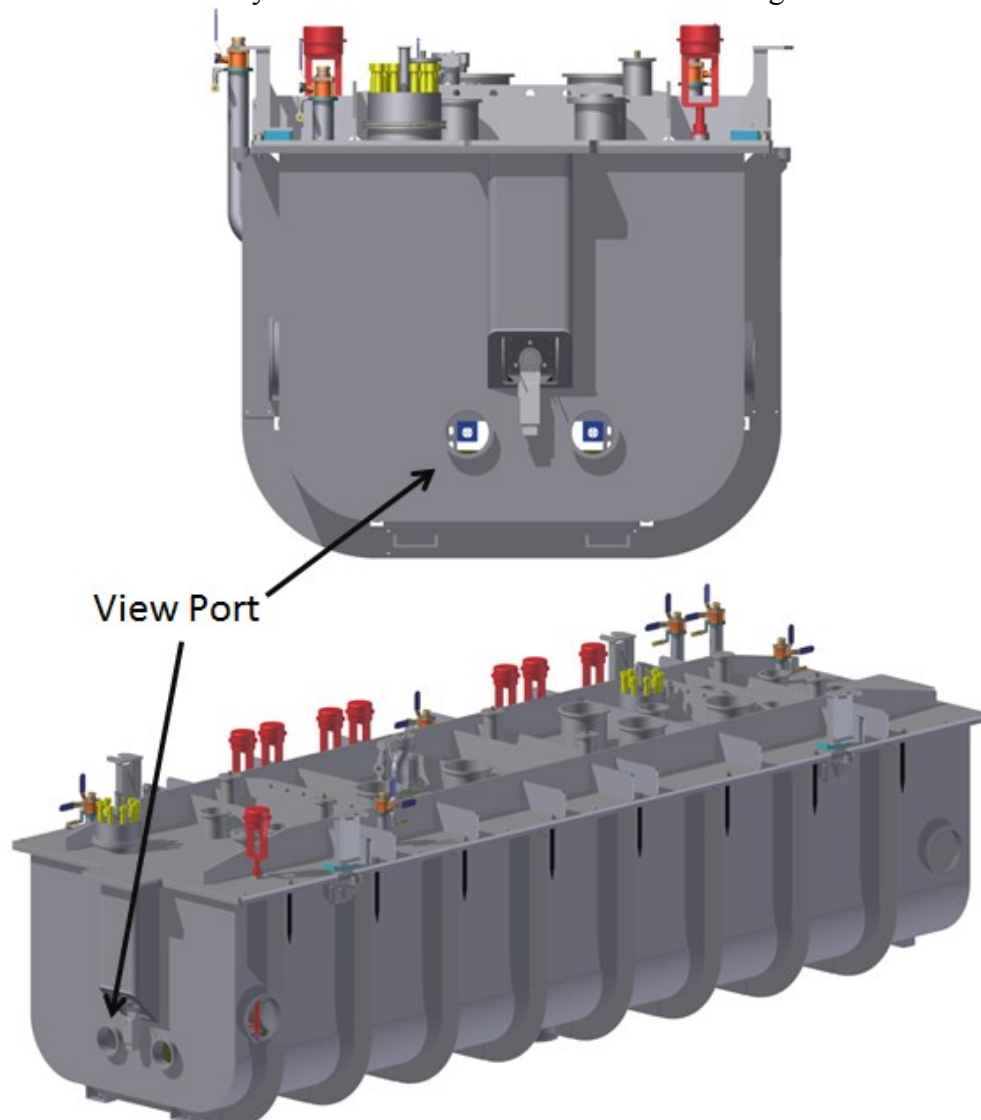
End view (Top) and perspective view (Bottom) of the HWR cryomodule showing the view ports for access to the open wire targets mounted on all cavities and magnets.
